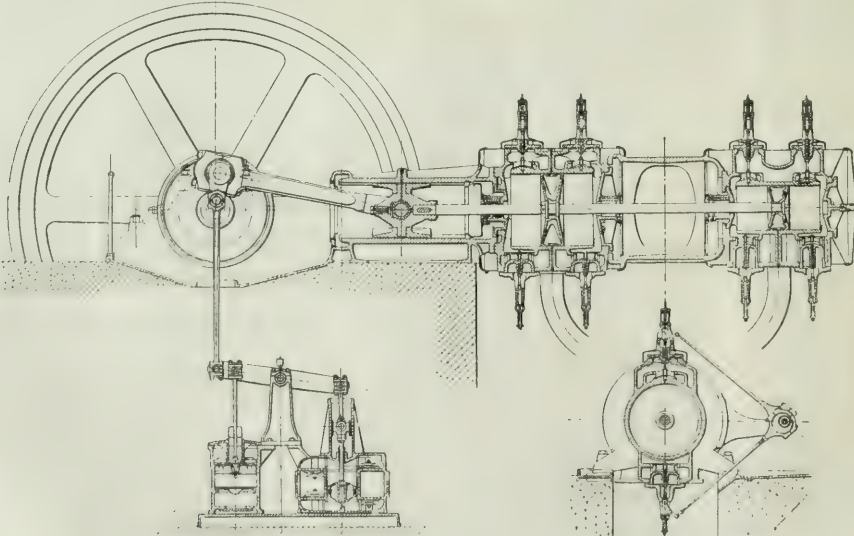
SECTION THROUGH A HORIZONTAL "LENTZ" ENGINE.
